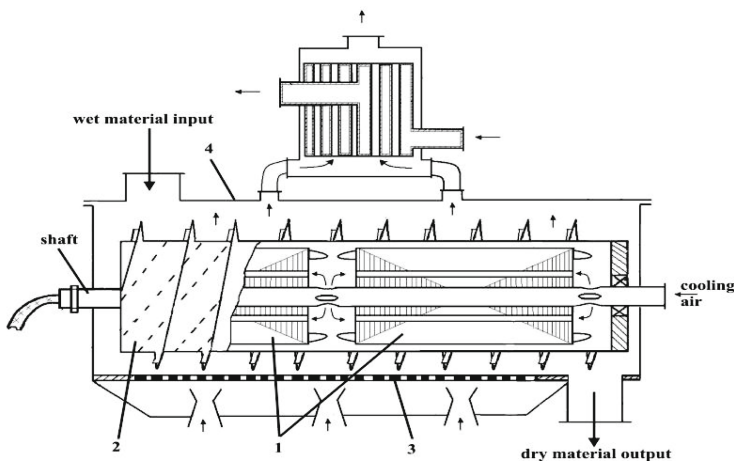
The design of the screw electric motor: 1 – stators; 2 – solid rotor; 3 – heater; 4 – housing.
